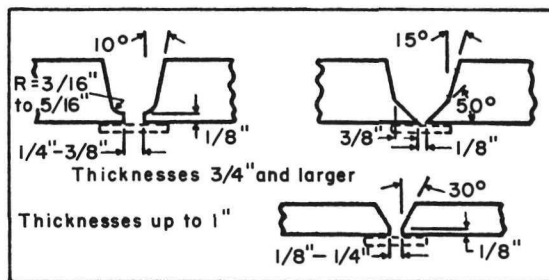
Typical butt-weld joint design for submerged-arc welding.
